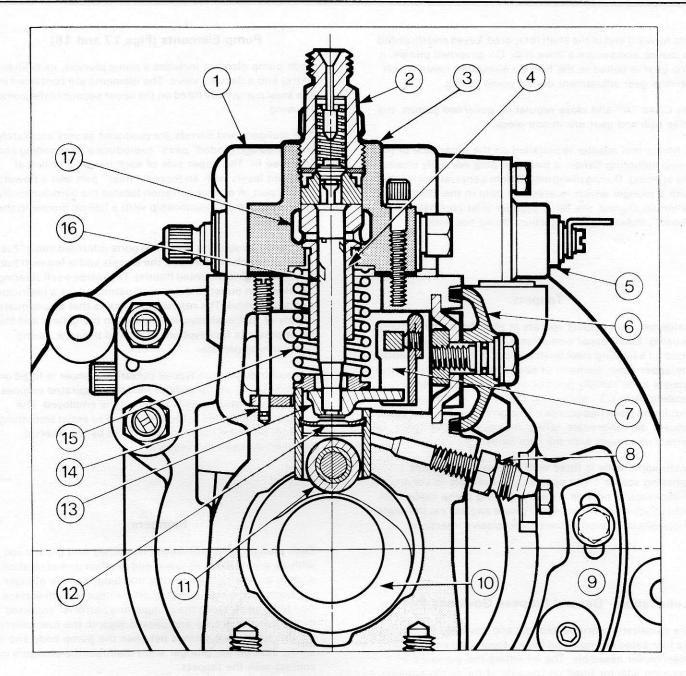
Sectional View of Injection Pump (General Purpose Pump)
